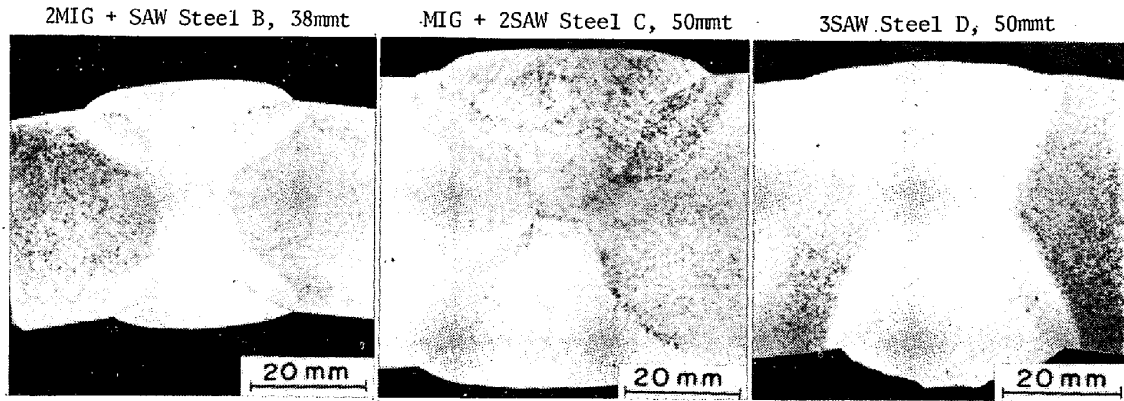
Macro-structures of welded joint in MIG+SAW and 3SAW processes.
